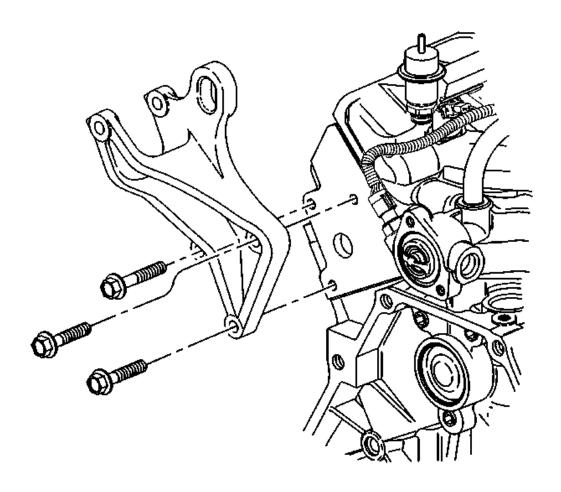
Left Engine Mount Strut Bracket Courtesy of GENERAL MOTORS CORP.
